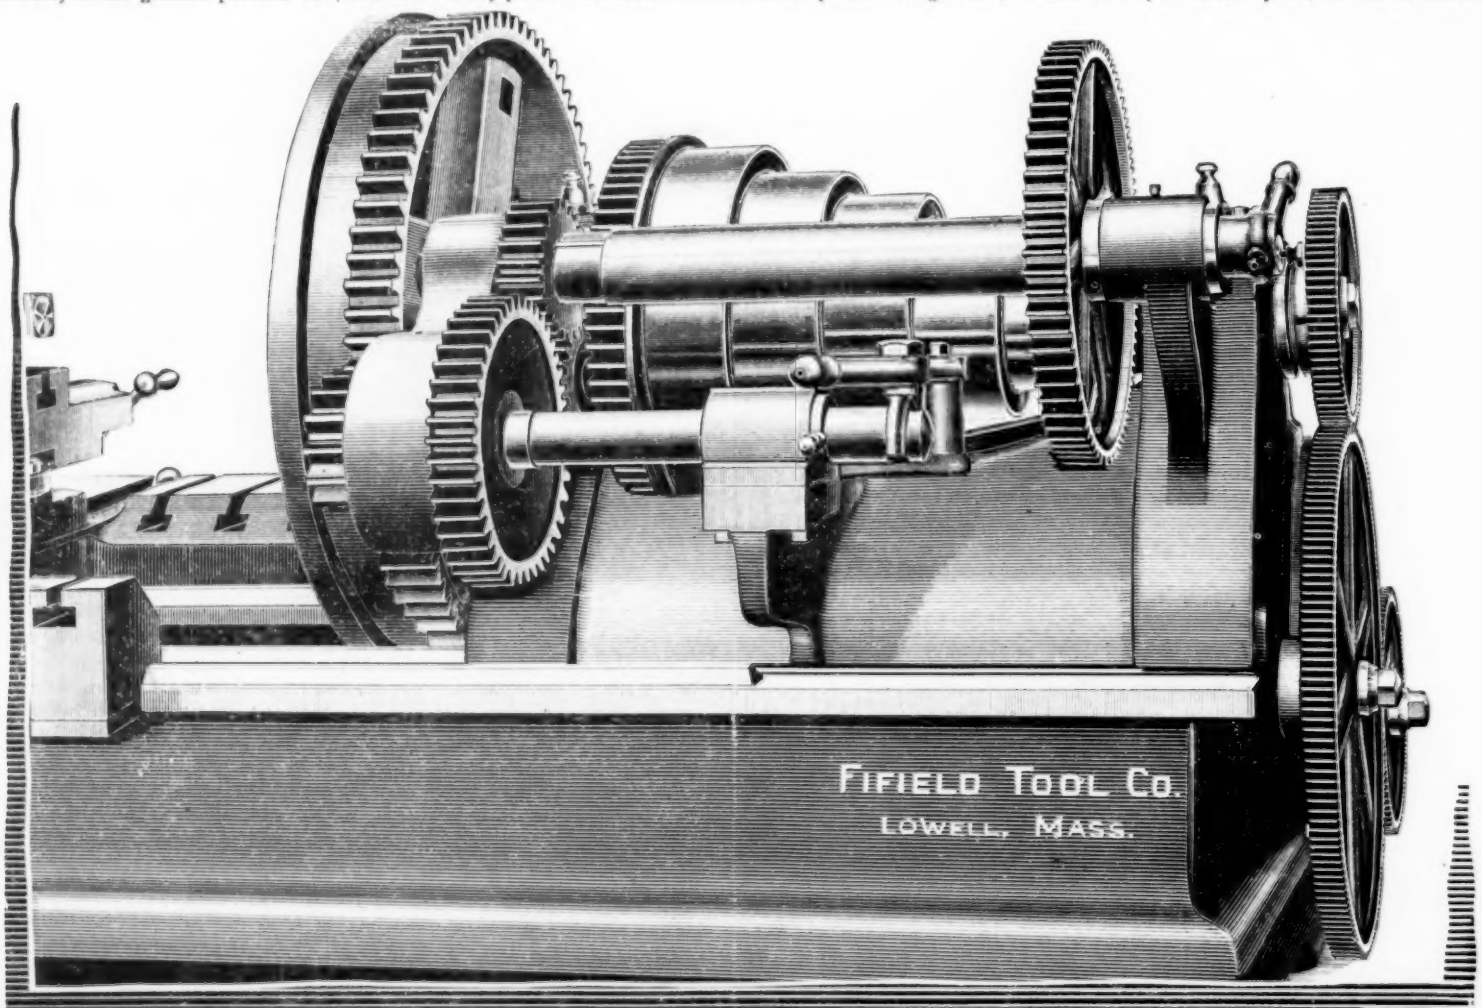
NEW 40-INCH GEARED ENGINE LATHE.
